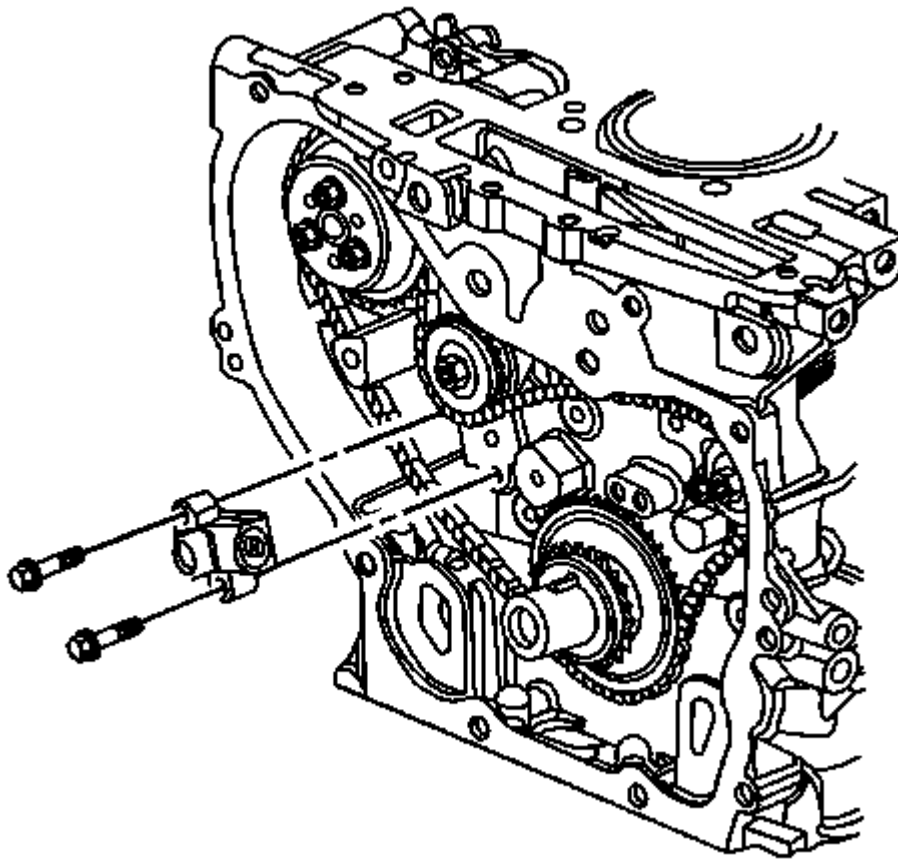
Timing Chain & Camshaft Position Actuator
